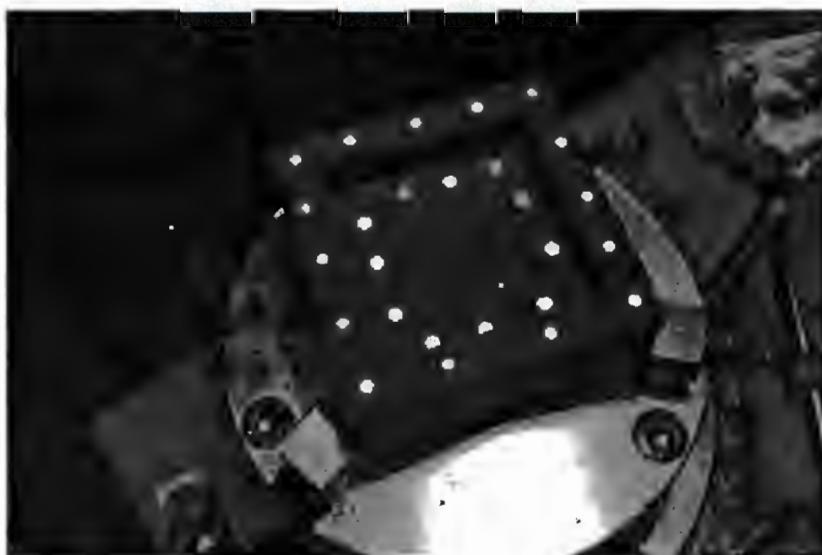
Pratt & Burnerd rotary table with control frame in position for testing.
